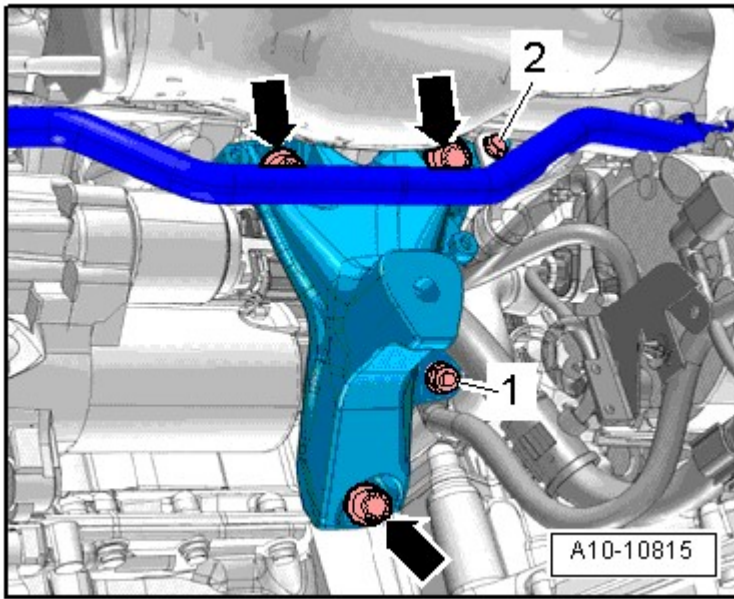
Removing Bolt -2- And Lay Secondary Air Pipe Aside
